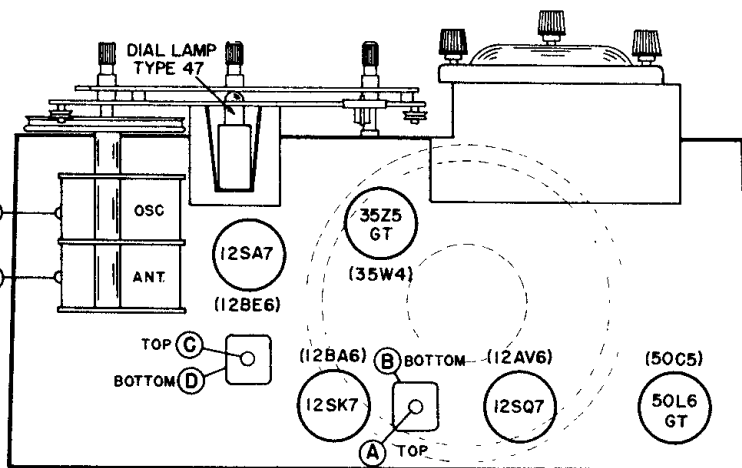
Top View of Chassis Showing Location of Tubes and Alignment Adjustments
